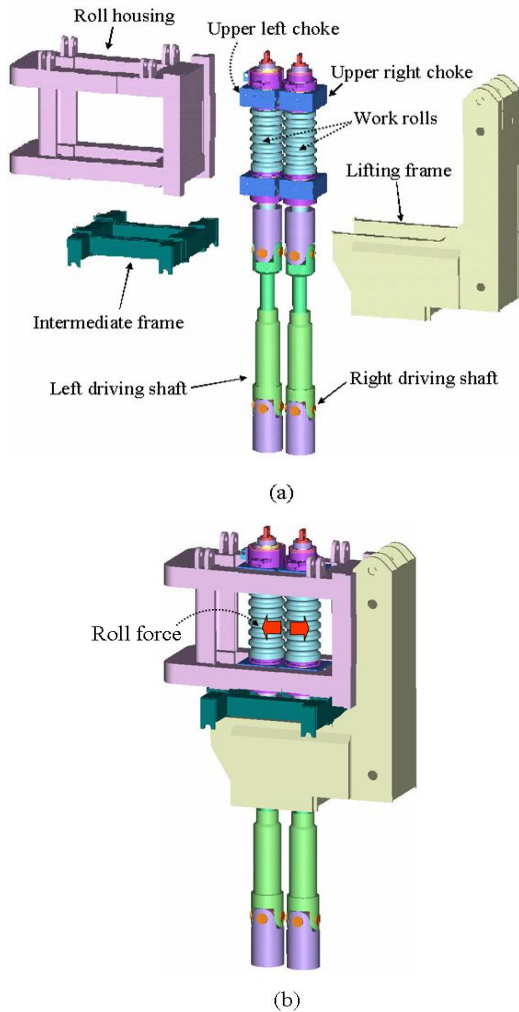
3D modeling of the actual hot rod mill. (a) representative components of a vertical-type stand (b) 3D modeling of the whole vertical-type stand assembled
